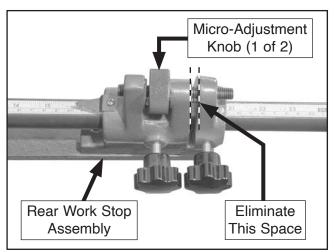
Rear work stop assembly installed on rear work stop support rod.
